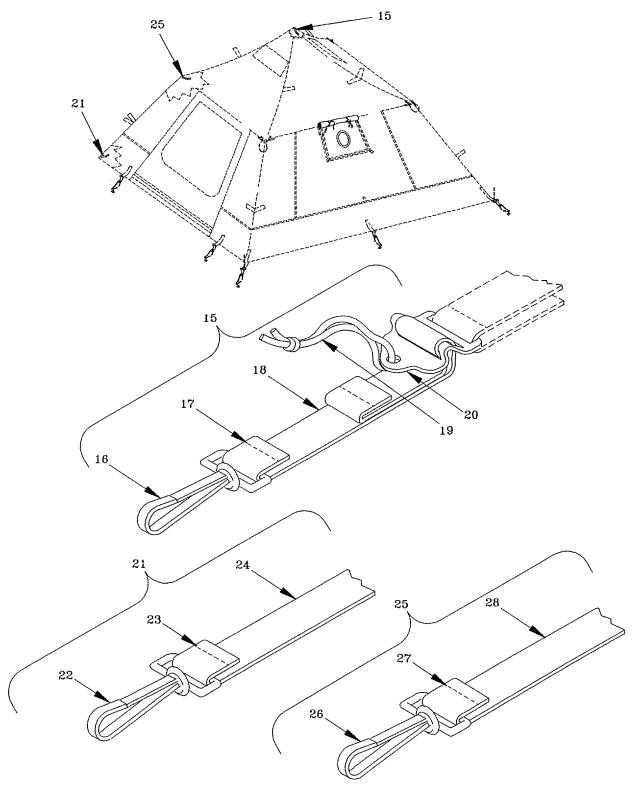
TENT BODY ASSEMBLY (Sheet 2 of 10)
